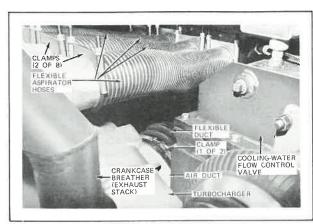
TURBO INSTALLATION DETAILS, COMPRESSOR END.
